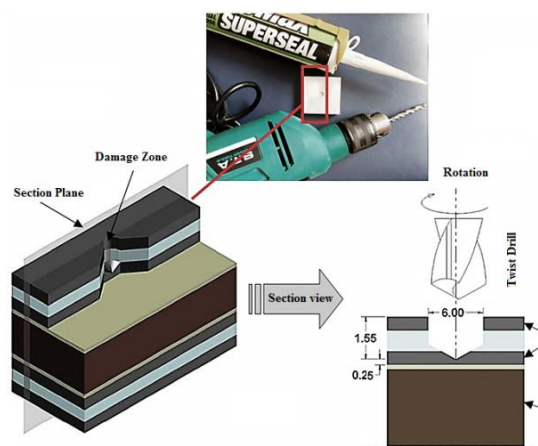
Details of artificial damage to specimens made of sandwich structure consisting of balsa core and FML skin.
